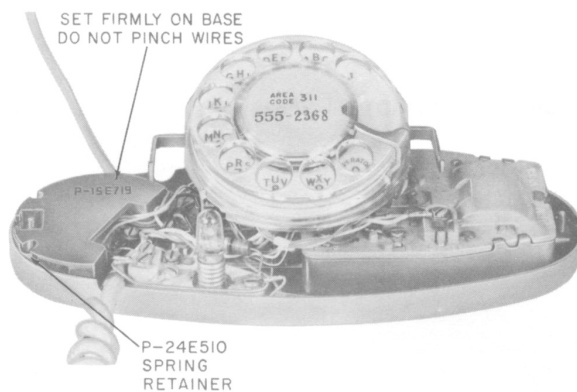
Location of P-24E510 Spring Retainer and P-15E719 Weight
